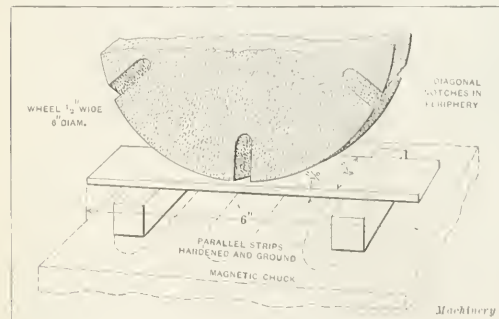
Method of holding a Thin Piece to prevent warping when grinding Dry
